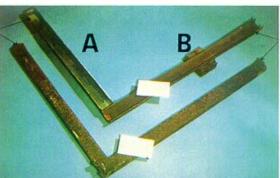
Tube(A) sealed and Tube(B) showing damage going back to original fabrication (First inspection programme)
